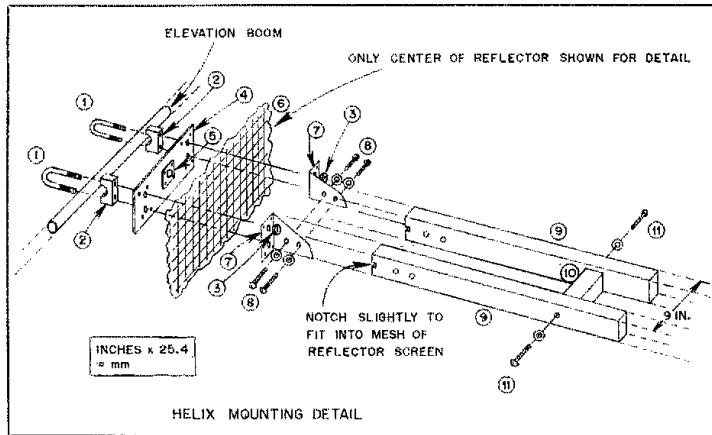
The details of the helix-mounting arrangement. See Table 1 for a number-keyed parts list.
